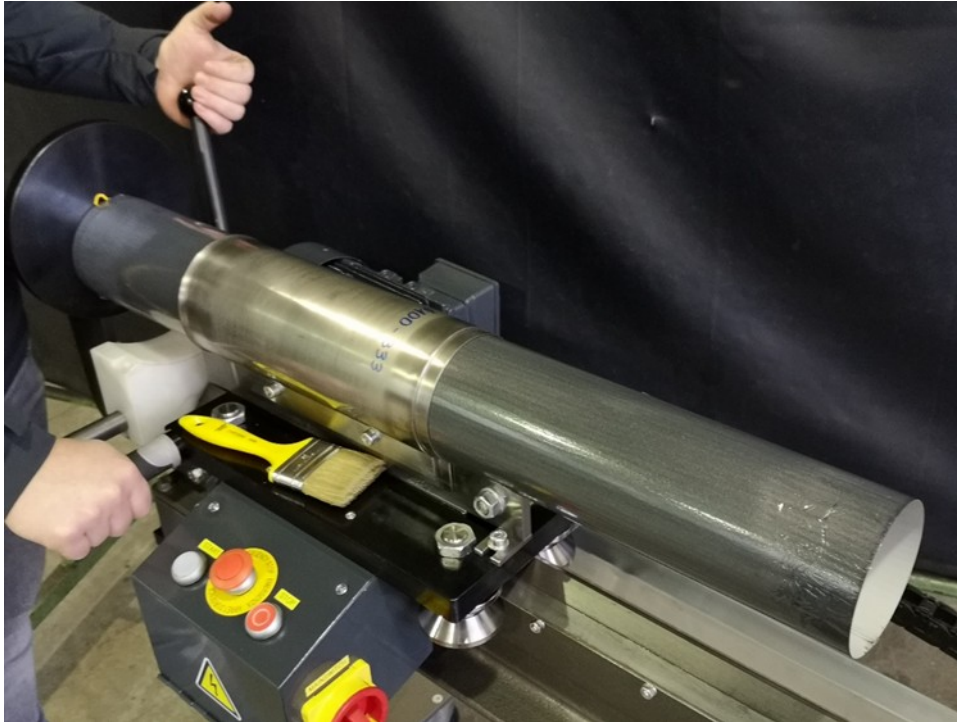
Disengage the drive sprocket by turning the lever towards the endplate.
